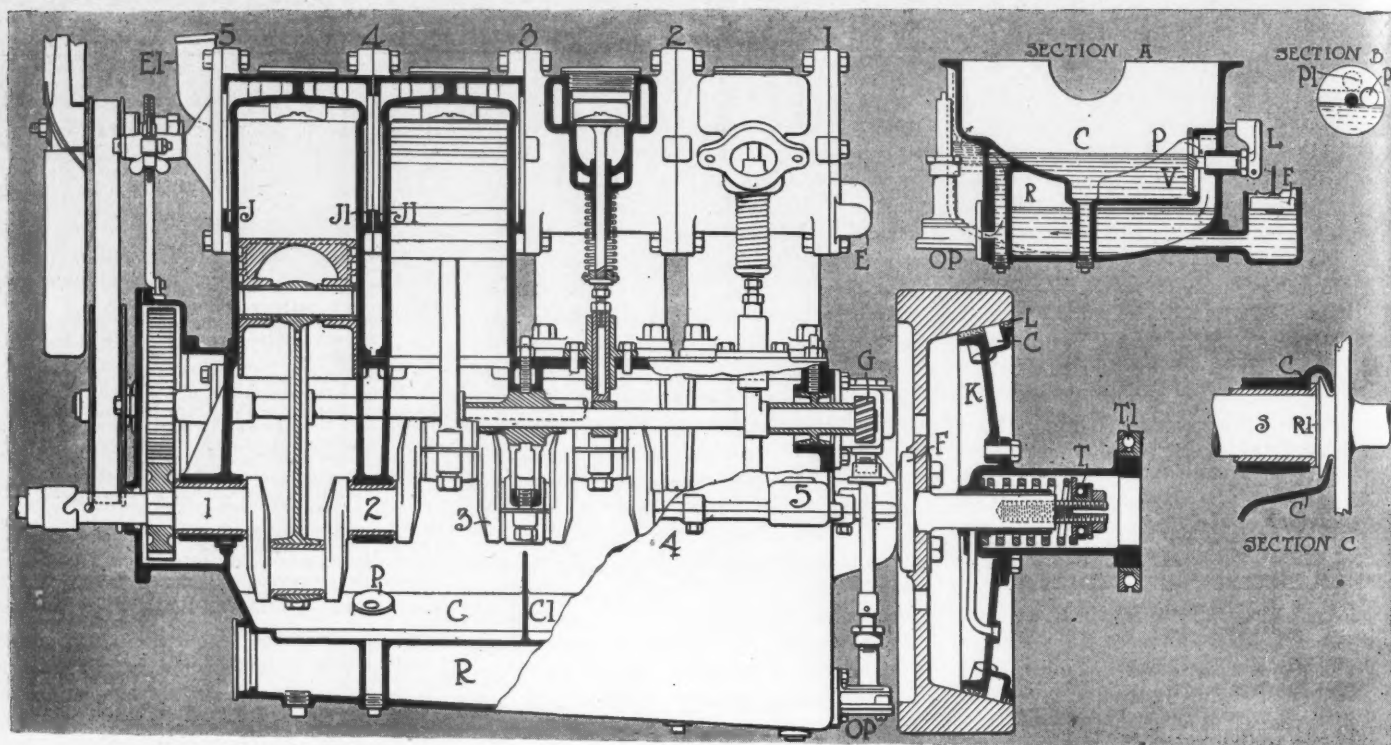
VERTICAL SECTION OF PULLMAN FOUR-CYLINDER MOTOR SHOWING THE CONTINUOUS WATERJACKET FORMED BY CUTTING AWAY THE JACKET ENDS AT J1 AND BOLTING THE FOUR CYLINDER CASTINGS TOGETHER, FORMING IN REALITY A MONOBLOC CONSTRUCTION
